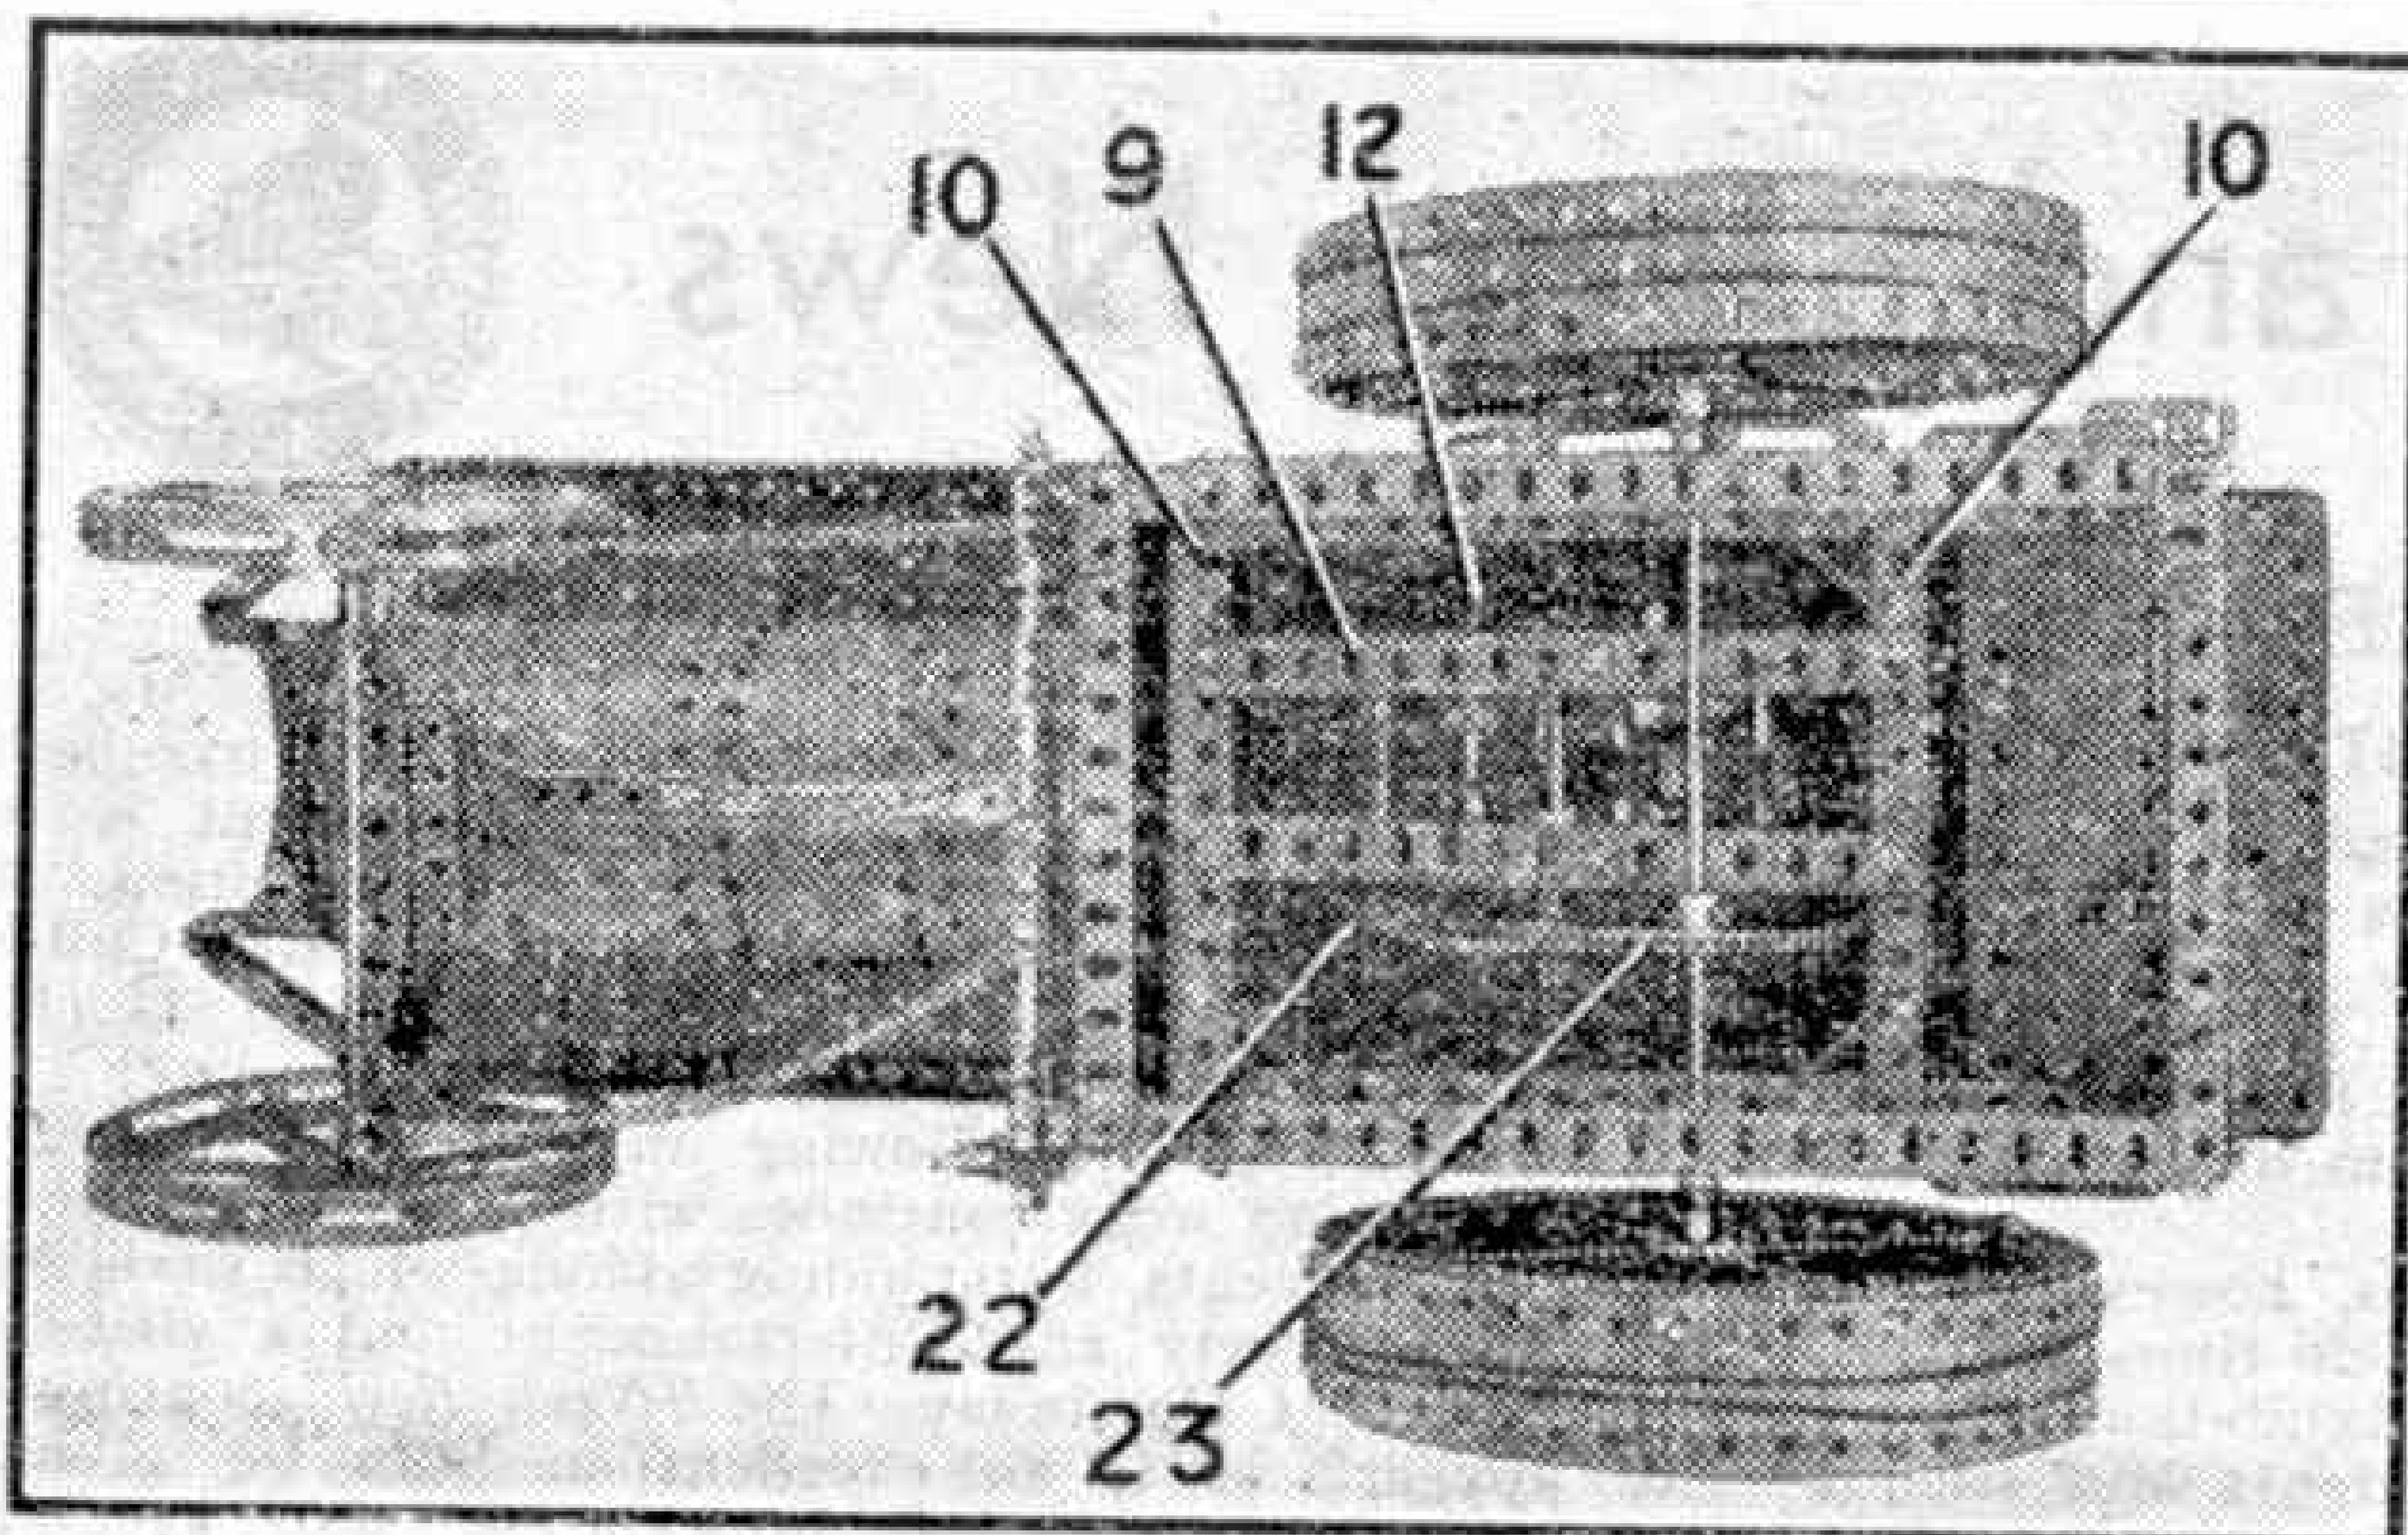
An underneath view of the tractor showing the Motor unit in position and the drive to the rear axle.
